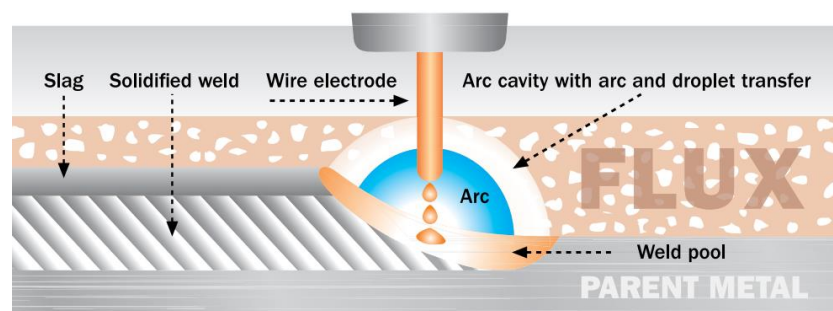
Function of Flux during welding by Submerged arc welding [10]
